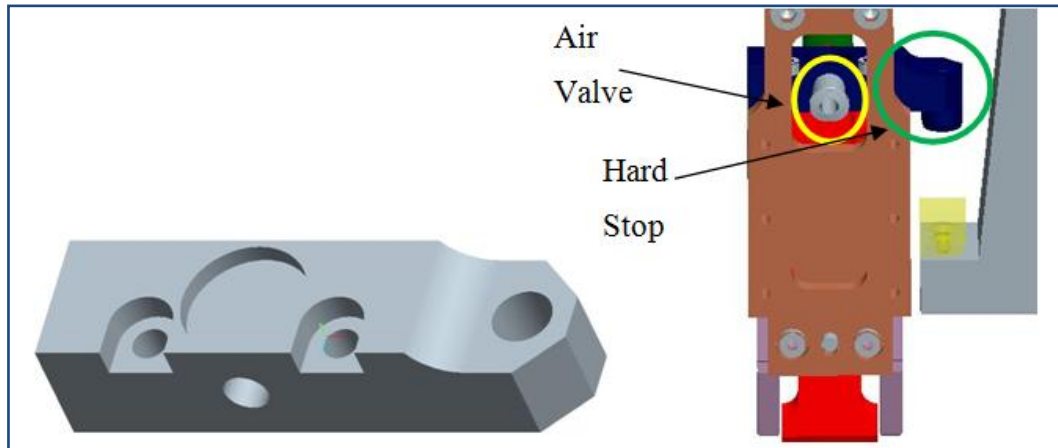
New Vacuum Head Stop and Vacuum Assembly
